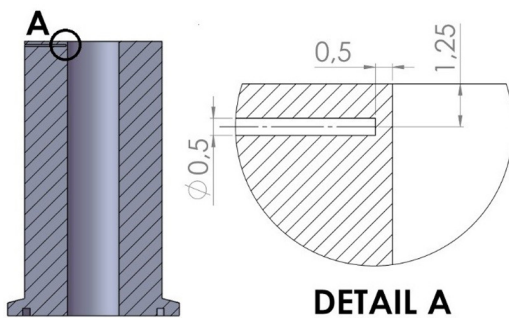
Thermocouples position on the HFDB tube to tube sheets experiments.
